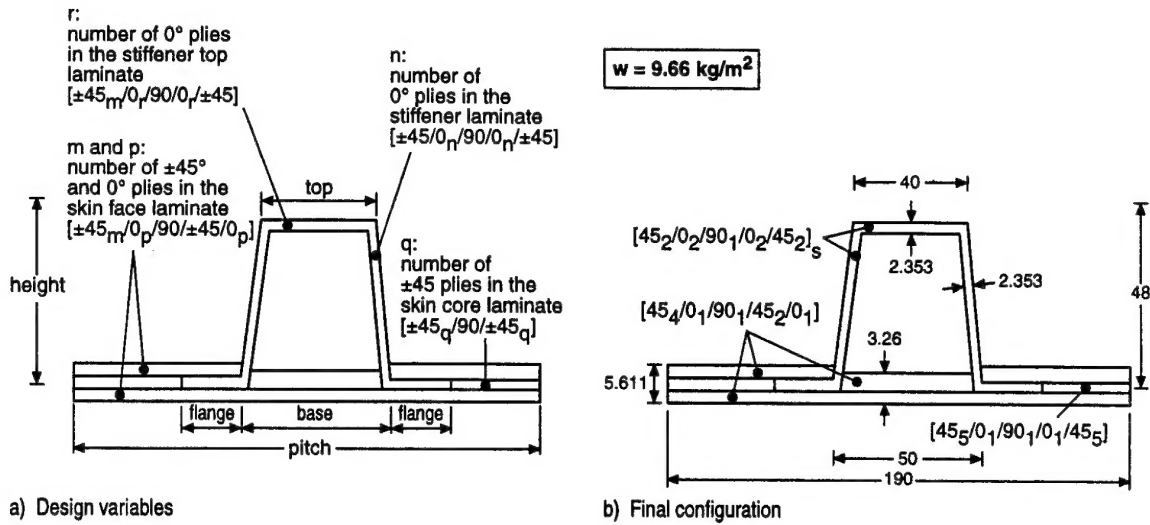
Hat-stiffened, flush-skin design (dimensions in mm)
